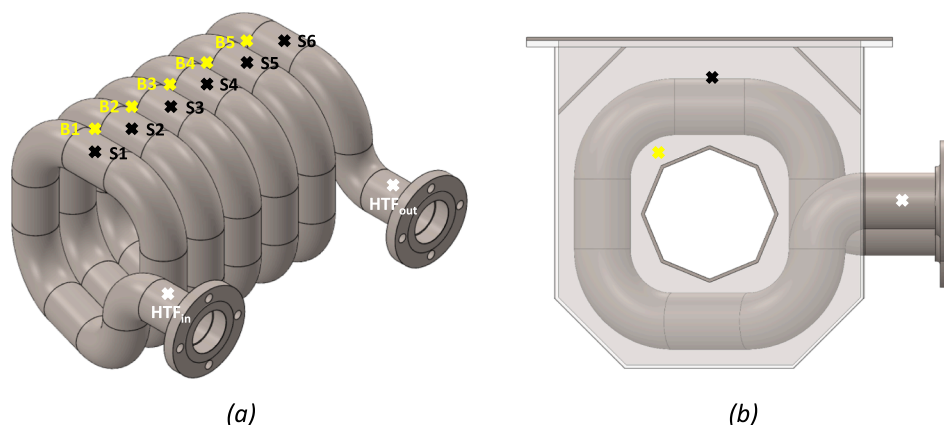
Thermocouple locations: (a) isometric view of the coil with thermocouple probes and weld-on thermocouples; (b) side view of the coil with detail on the location of the weld-on thermocouples and thermocouple probes.
